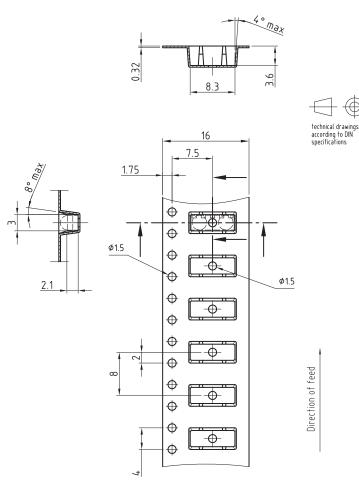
Issue: 1; 12.02.07 20628
